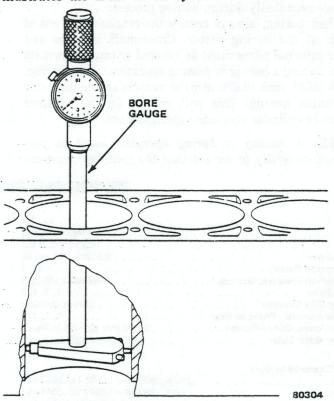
Measuring Cylinder Bore with Bore Gauge
